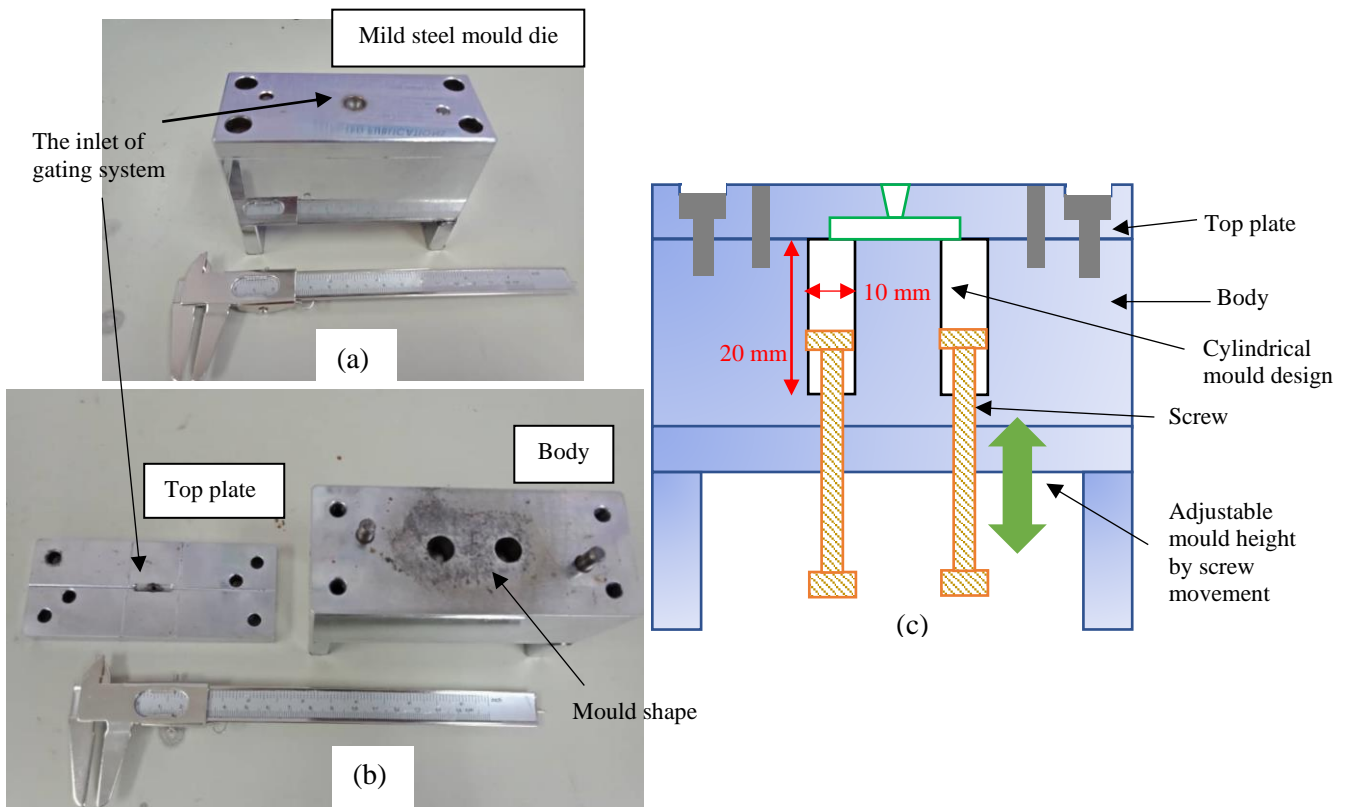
; (a) The customized mould design, (b) disassemble parts of the top plate and body, (c) the schematic diagram of mould design
